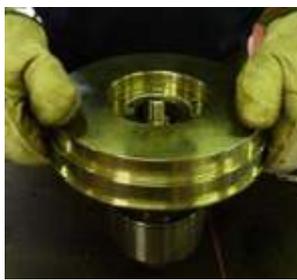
Insert the hex head screws (901.1) and relevant safety washers (934) in three holes at 120° in the bushing locking flange (935). Bend the safety washers (934) onto the external edge of the bushing locking flange (935).
